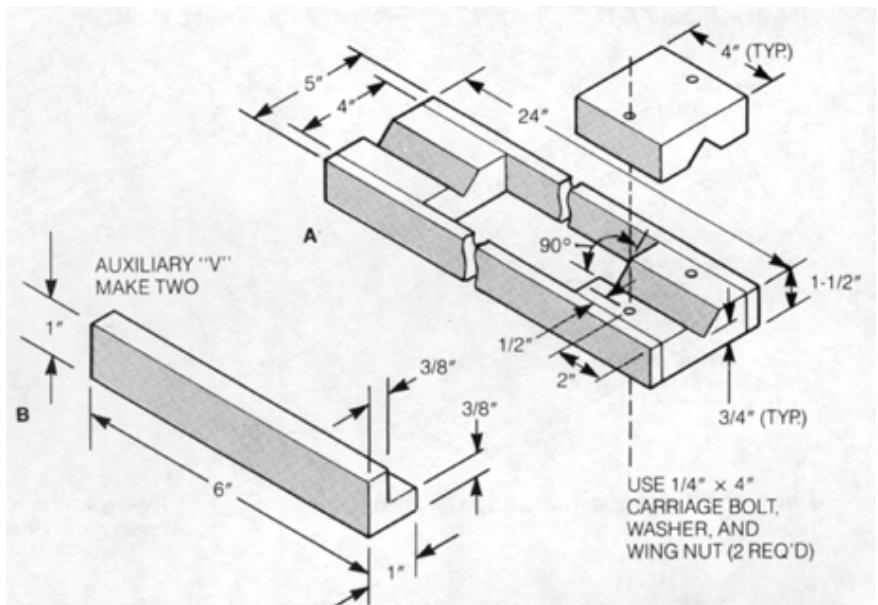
Construction details of the (A) extension V-block and (B) the auxiliary V's. The shape needed is actually a rabbet cut.
